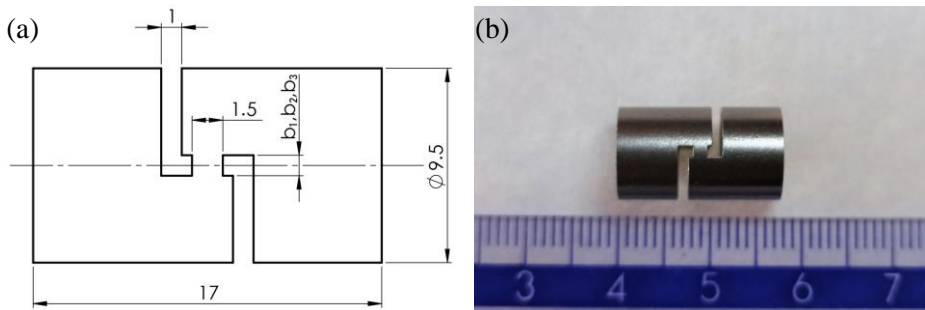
(a) nominal geometry of the samples, (b) test sample after cutting and sandblasting
